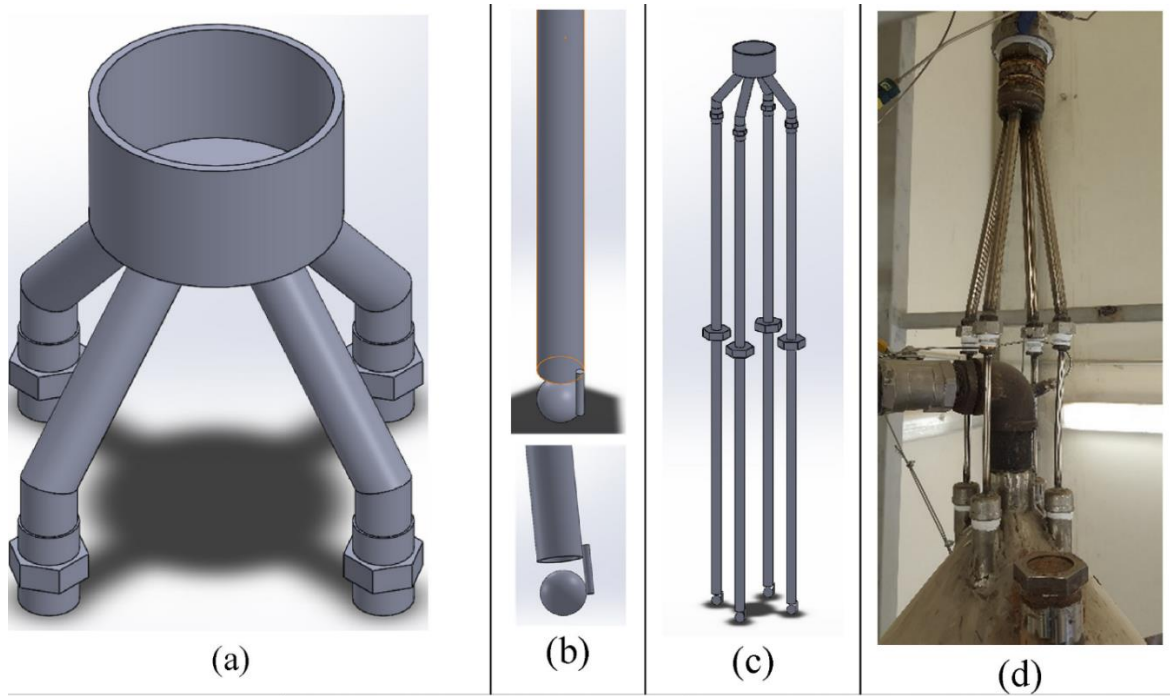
Particle distributor module (a) the manifold assembly, (b) distributor pipe, and (c) module assembly, (d) snapshot of the assembly as developed by Alaqel [32].
